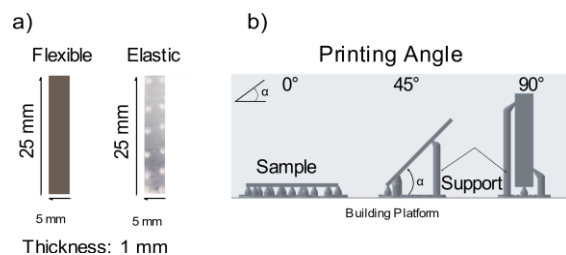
25x5x1 mm³ tensile test samples printed with flexible and elastic (a) and schematic view of printing setup (b).
